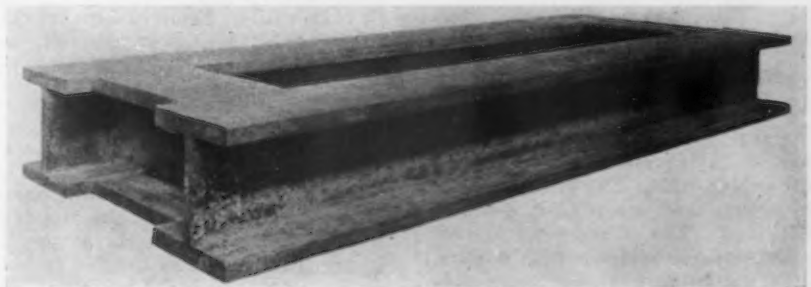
In constructing the base for the lifting device, the flanges of the H-beams were cut out and the ends inserted between the flanges of the parallel beam.
